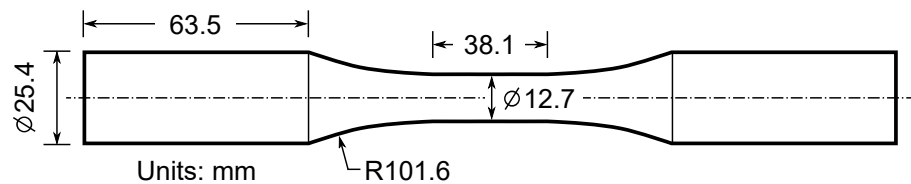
Dimensions of the samples used in the uniaxial tests in this study.
